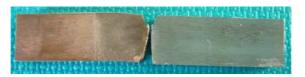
Fractured Charpy impact specimen of SS/CuCrZr joint.
